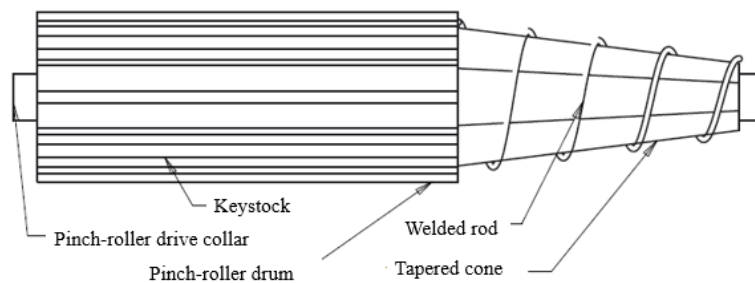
A schematic of the pinch-roller assembly with the tapered cone and welded rod
